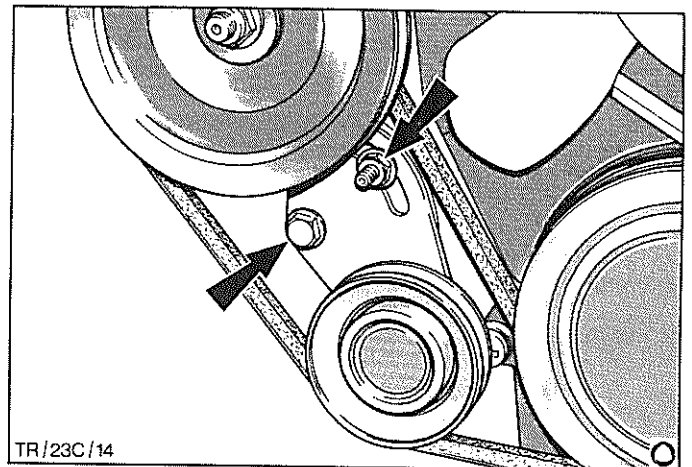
Refit vacuum pump drive belt and adjust to correct tension.
